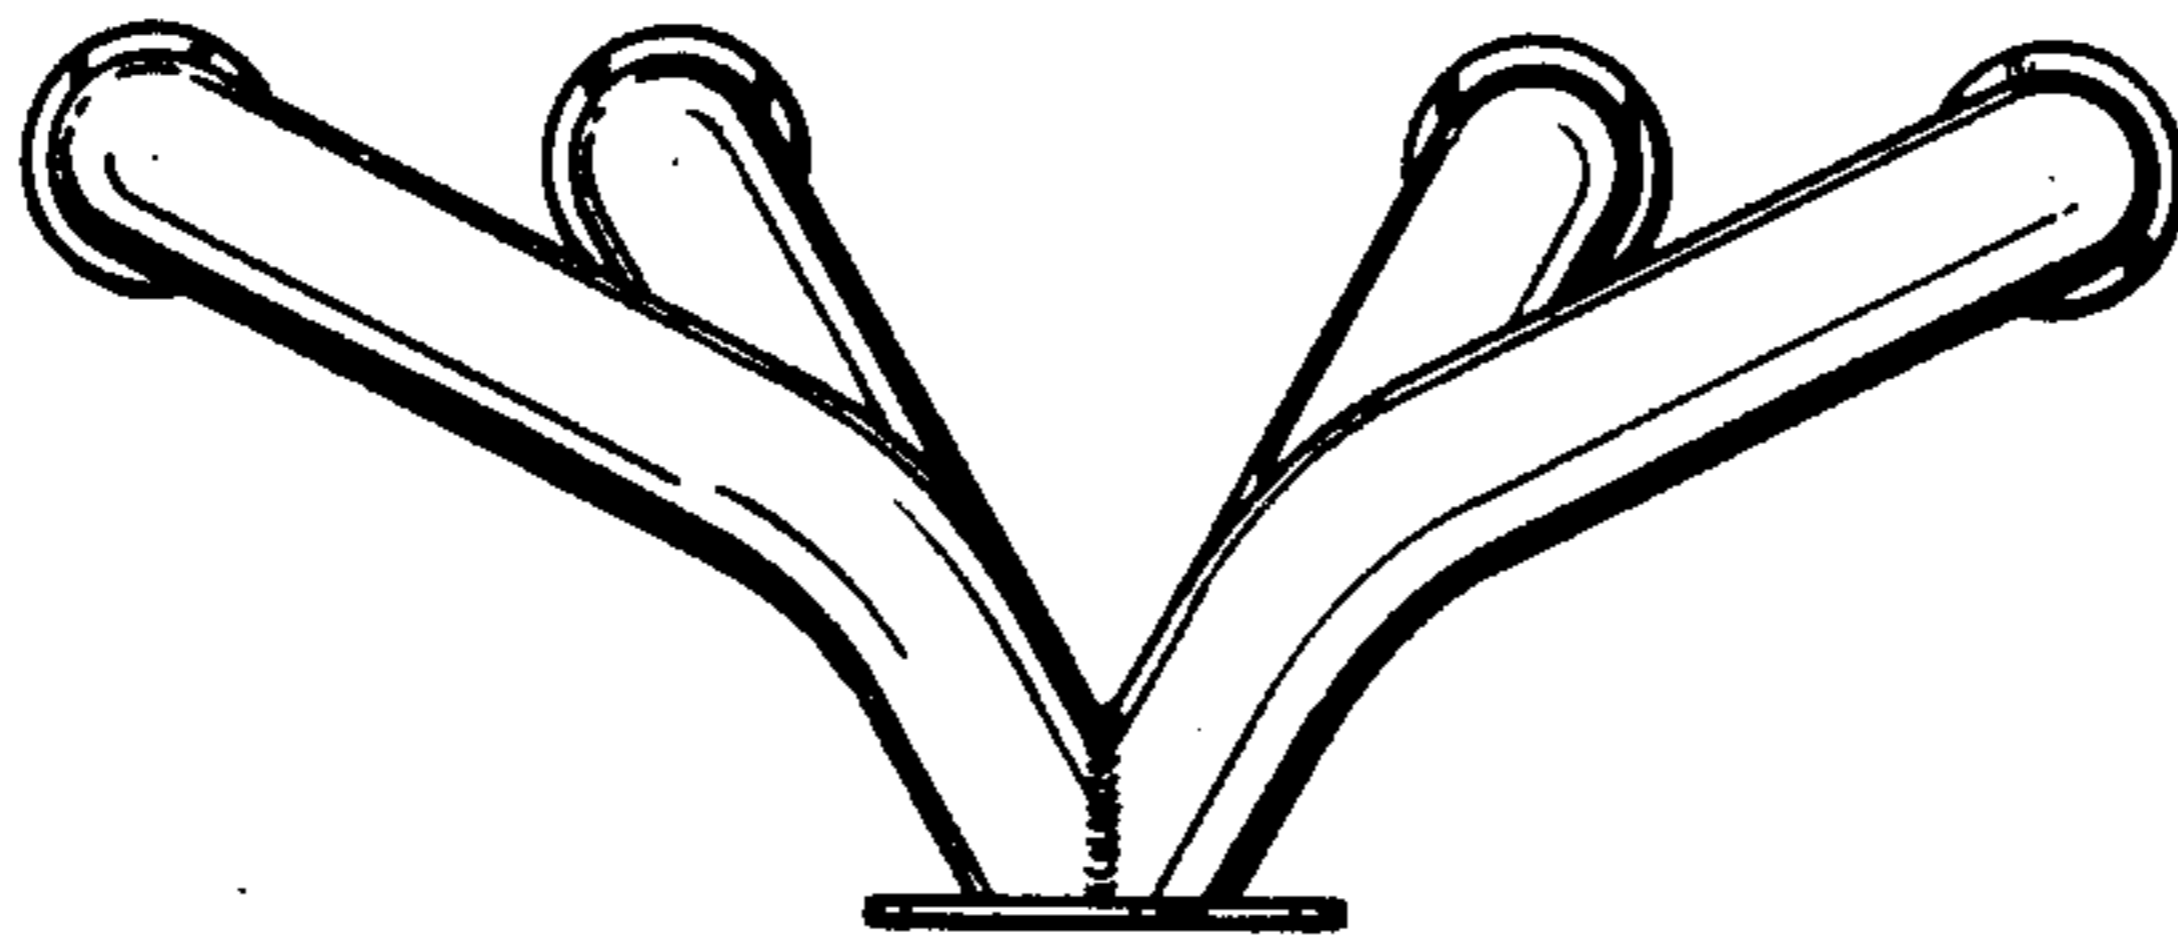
is a top plan view of an engine exhaust header pipe unit showing my new design;
